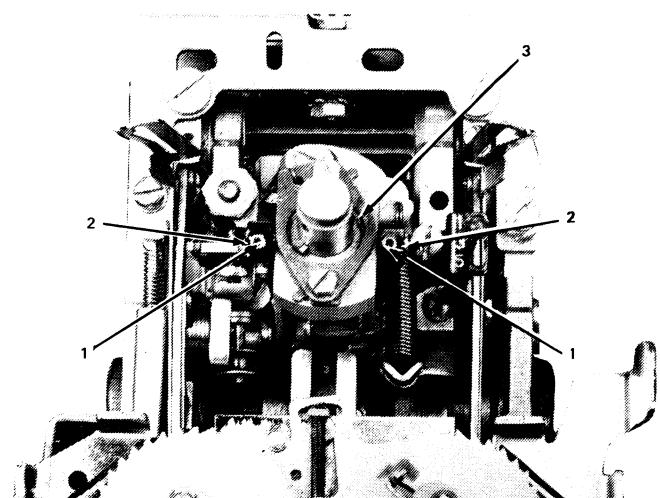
Lower Ball Socket and Tilt Ring Removal (Top of Carrier)
